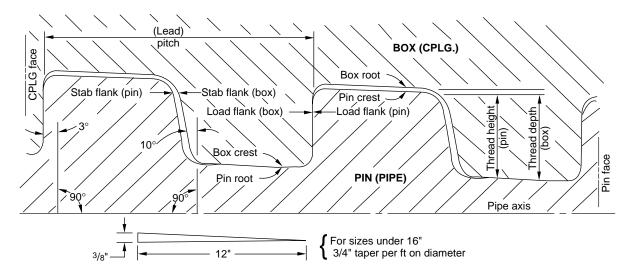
Buttress Thread Configuration for 13<sup>3</sup>/<sub>8</sub>-in. OD and Smaller Casing
